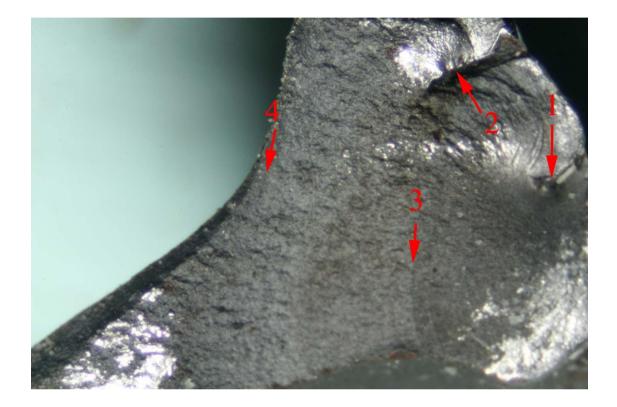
Magnified view of part of the fracture surface on the detached piece of rocker arm tip. Arrow 1 indicates an origin of fatigue at a seam in the casting. Arrow 2 indicates multiple origins of fatigue on a second seam in the casting. This region appears to have been a secondary origin of fatigue. Arrow 3 indicates one of the more distinct fatigue crack arrest striations. Arrow 4 indicates fainter and more widely spaced fatigue crack arrest striations.
